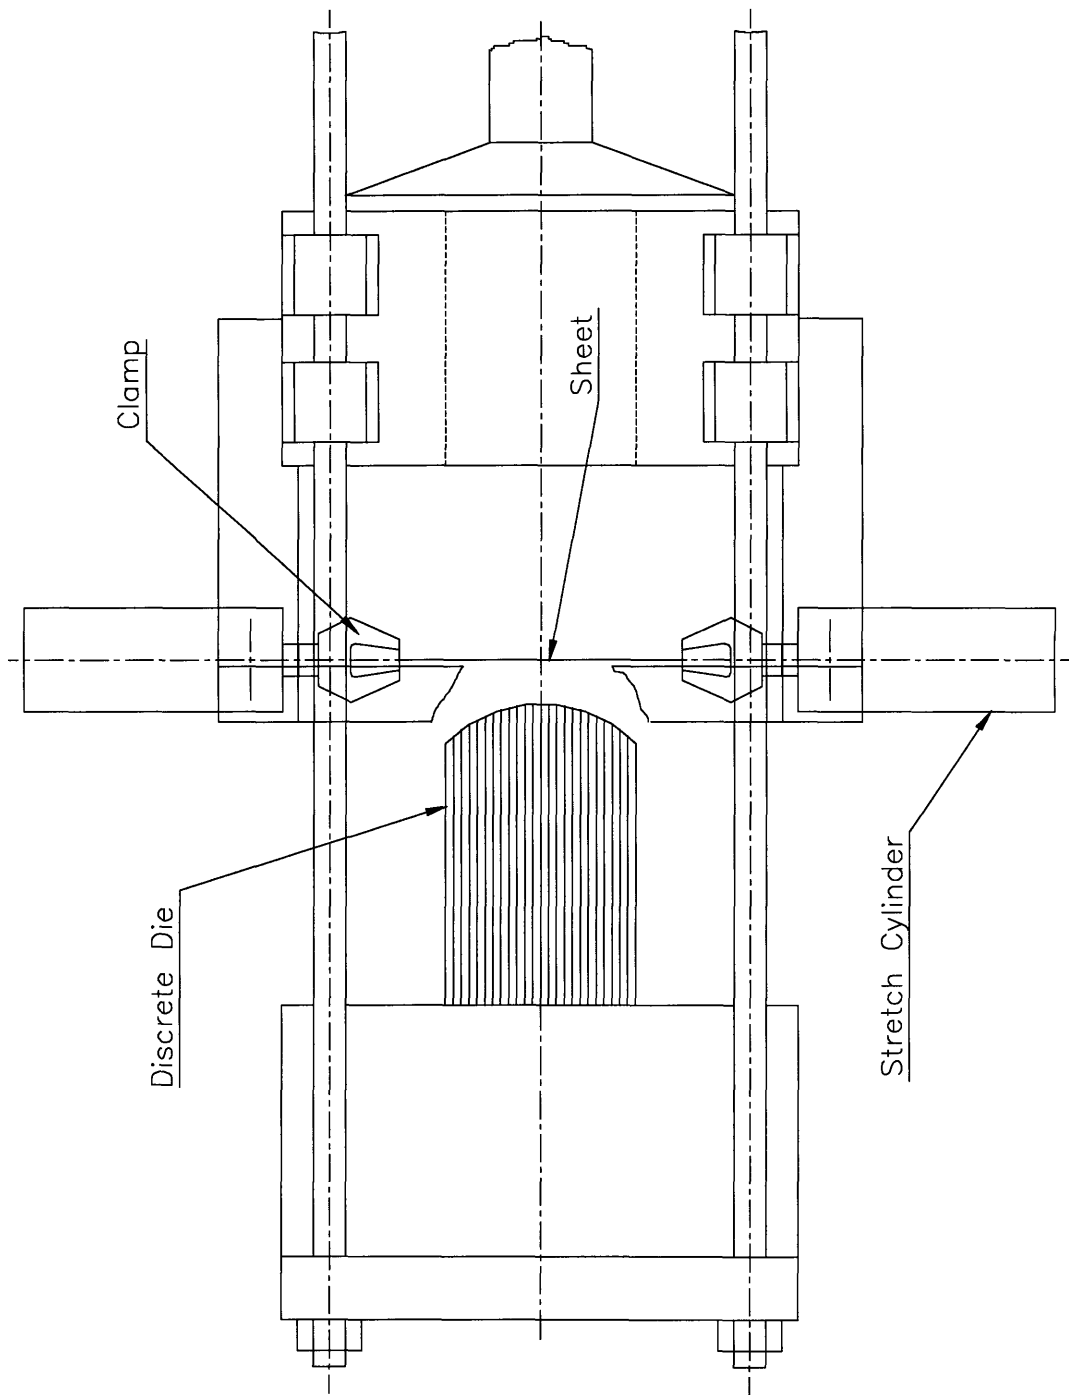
Top View of Stretch Forming Machine Before Forming
